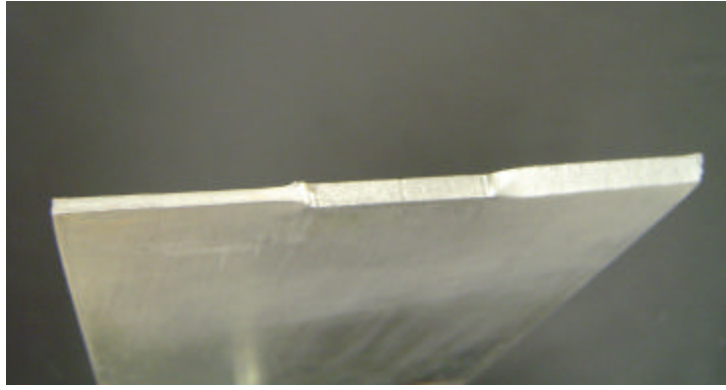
Fractured surface of the center crack specimen tested in Mode I loading.
